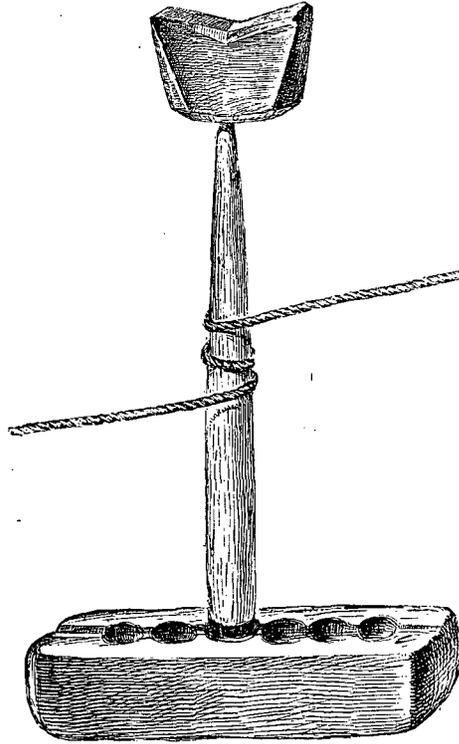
Esquimaux Cord Drill and Mouthpiece.
